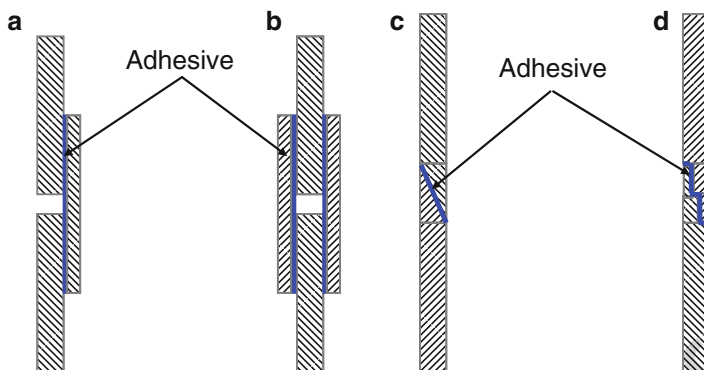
depicts some of the typical joint configurations to join structural panel components.
